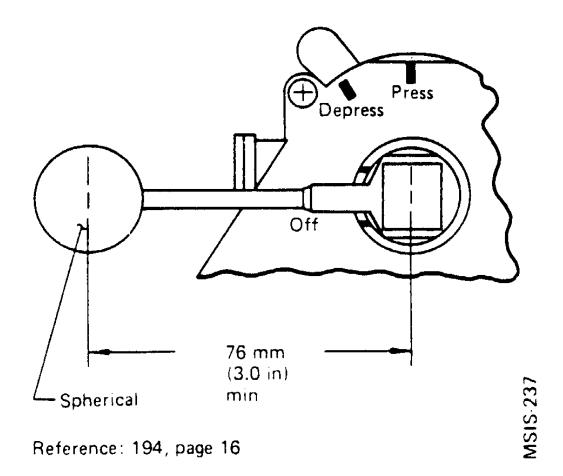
Valve Handle - Lever Type
